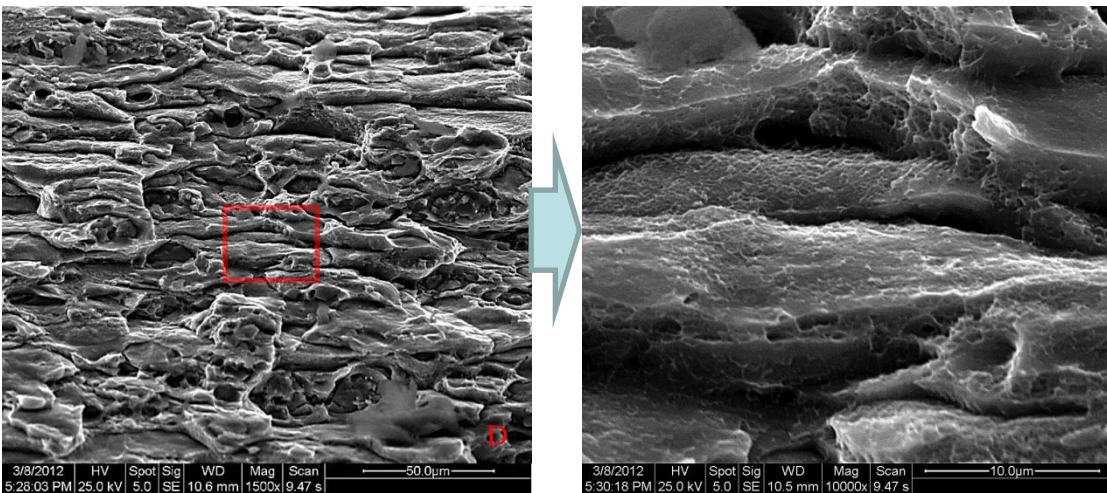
#3764 fracture surface structure away from the wormhole
